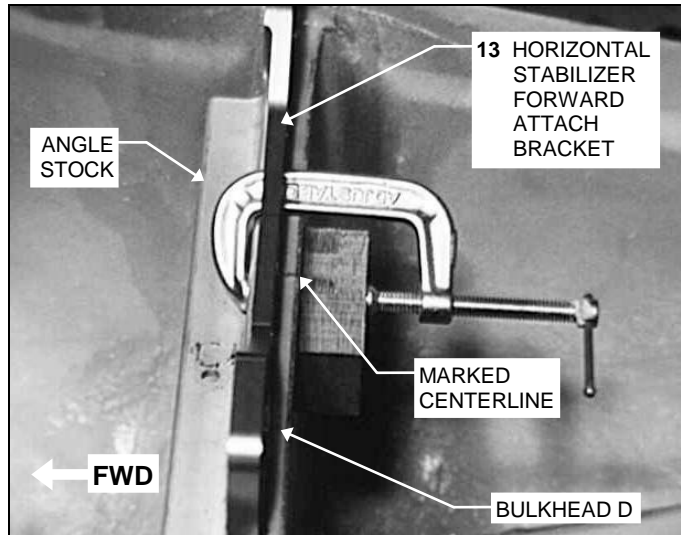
Clamping the Stabilizer Attach Bracket to Bulkhead D
